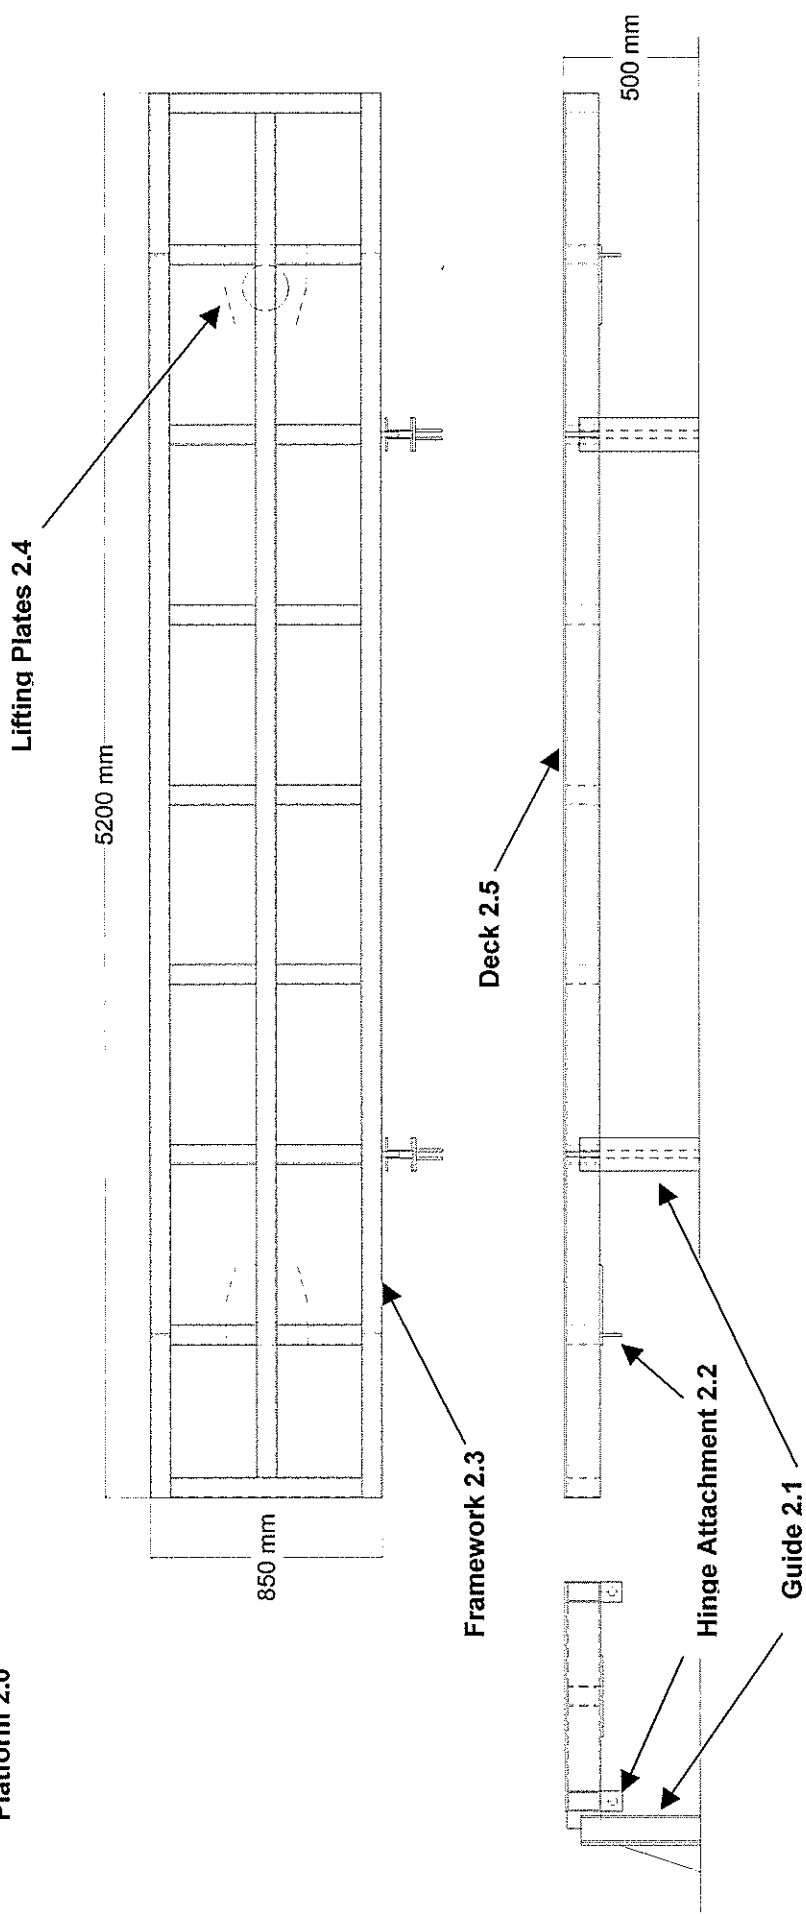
Platform 2.0, general arrangement, plan and elevation view (one platform only).
